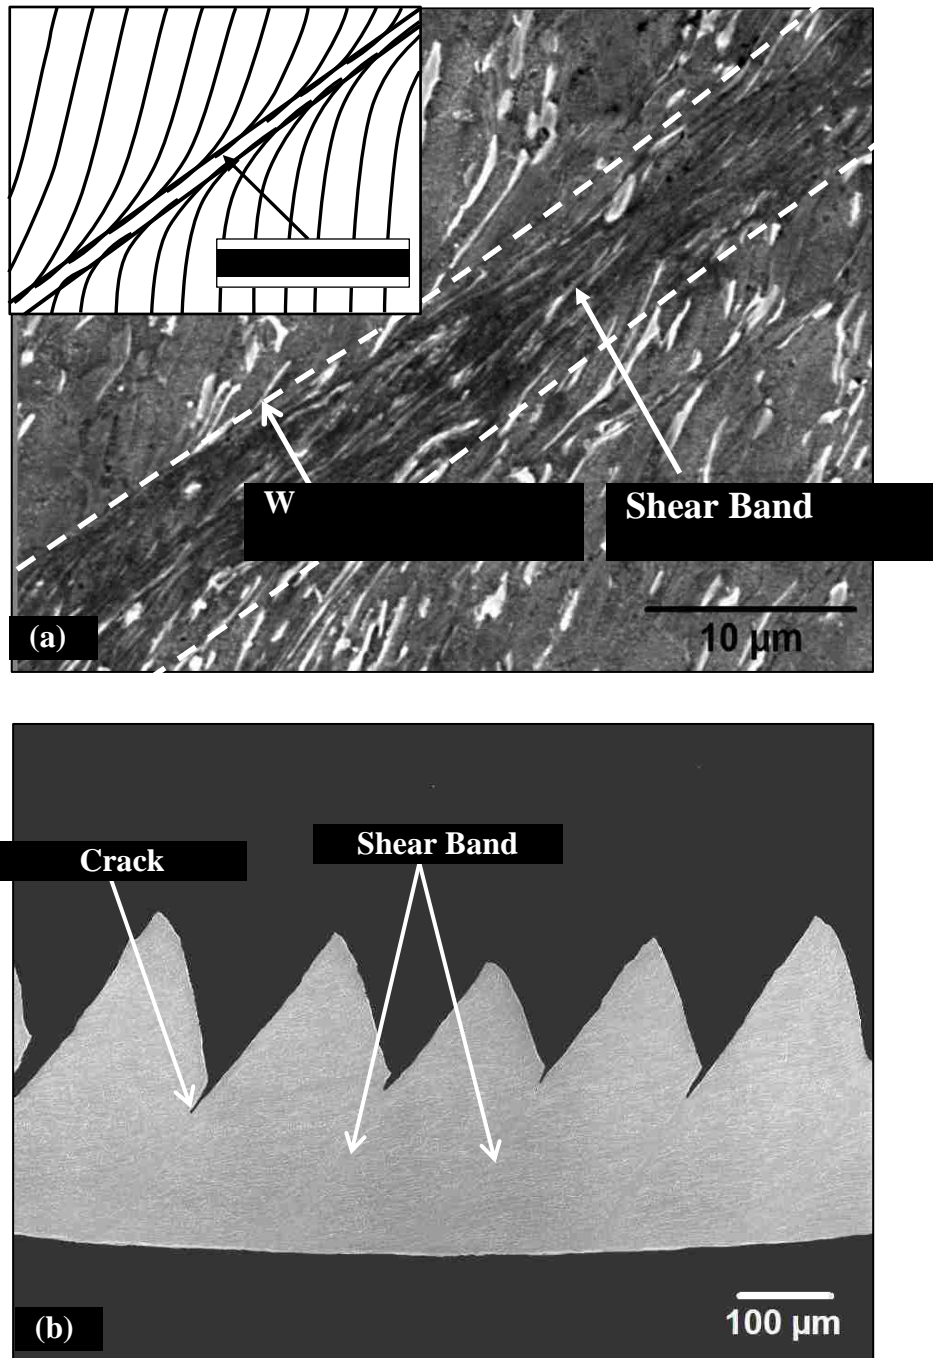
(a) SEM image of the shear band. Schematic diagram of the shear band is shown in the insert. Here w is the width of the shear band, (b) Diagram showing the crack at the end of the shear band. Machining conditions: 63.5 m/min cutting speed and 0.25 mm/rev feed rate.
